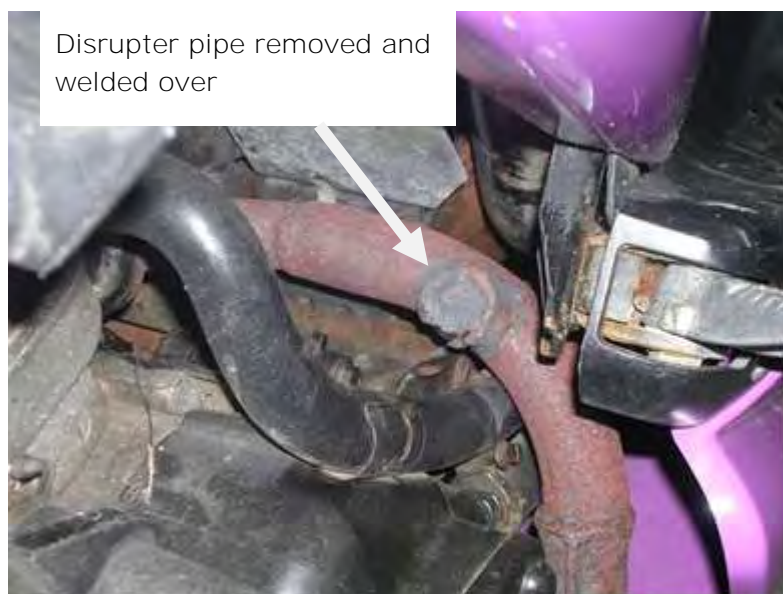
Inspected vehicle with exhaust disruptor pipe (stubber pipe) removed and hole welded over
